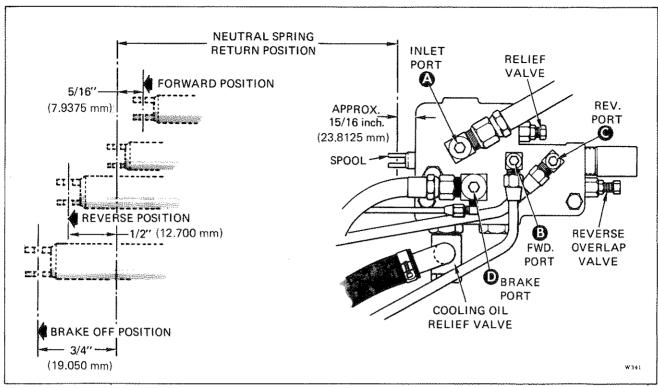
, CONTROL VALVE SPOOL TRAVEL CHECK
